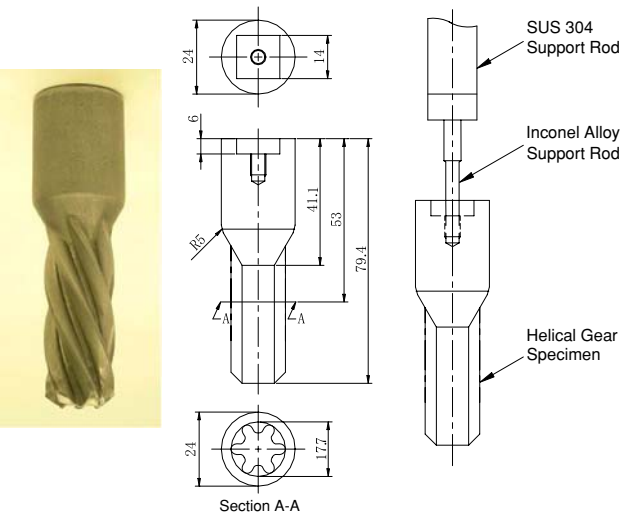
Configuration and detail dimension of SCr420H helical gear during stress-relief annealing, carburizing, and oil quenching
